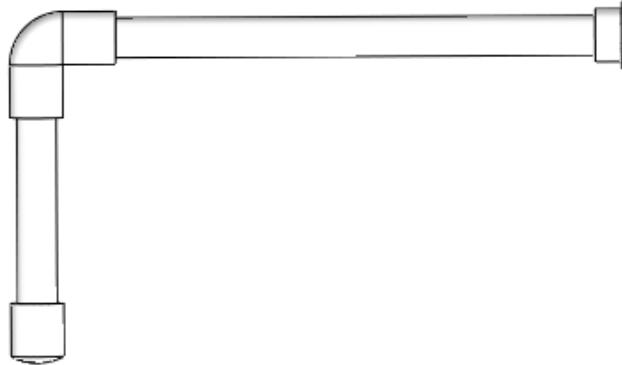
Top View of Components in “L” Portion of Foam Assembly with Foam Removed
